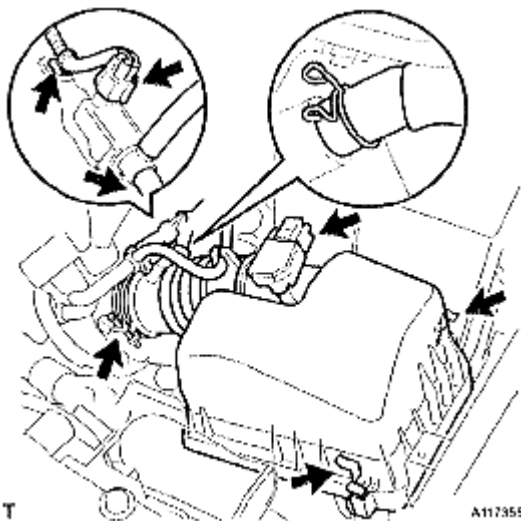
Locating Intake Air Flow Meter Connector And Wire Harness Clamp
